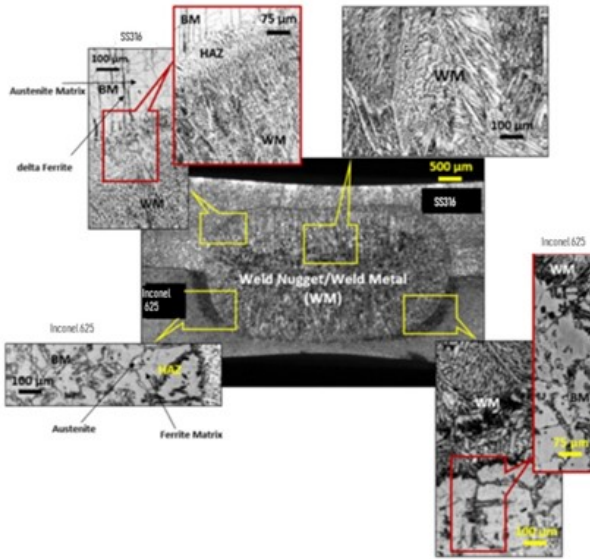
Optical micrographs of the resistance spot weld showing the weld metal (WM), HAZ in Inconel 625 and SS316 and, BM regions (sample 7)
